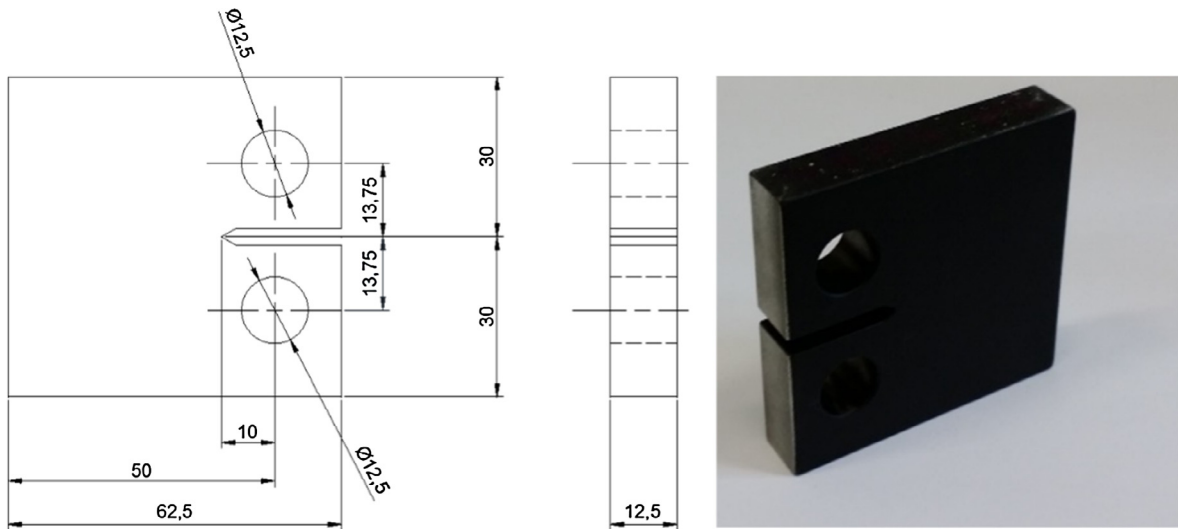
Specimen dimension in mm according to ASTM E 647.
